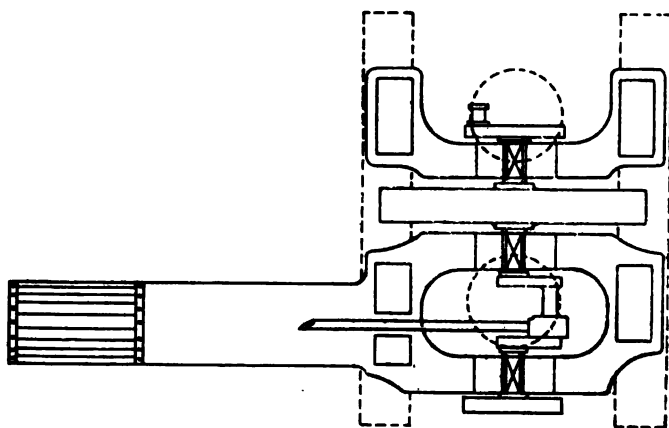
PLAN OF FIG. 80 WITH INSIDE FLY-WHEEL.
